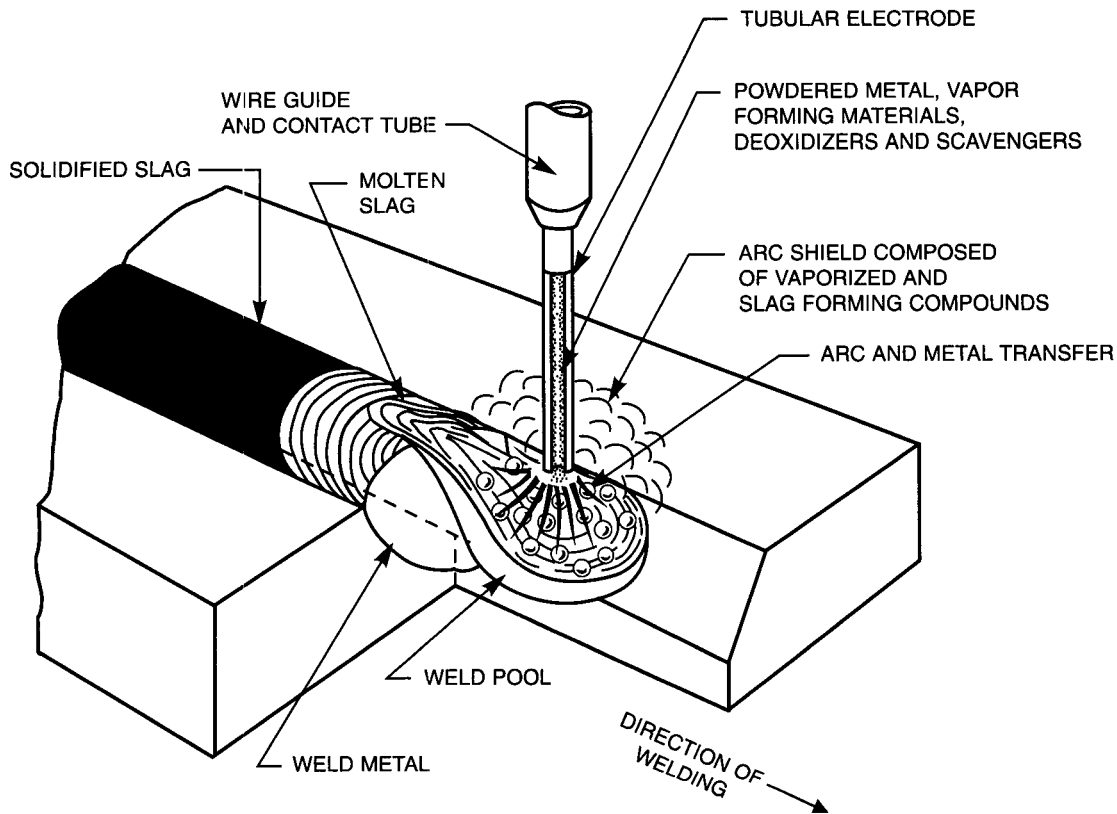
Self-Shielded Flux Cored Arc Welding
